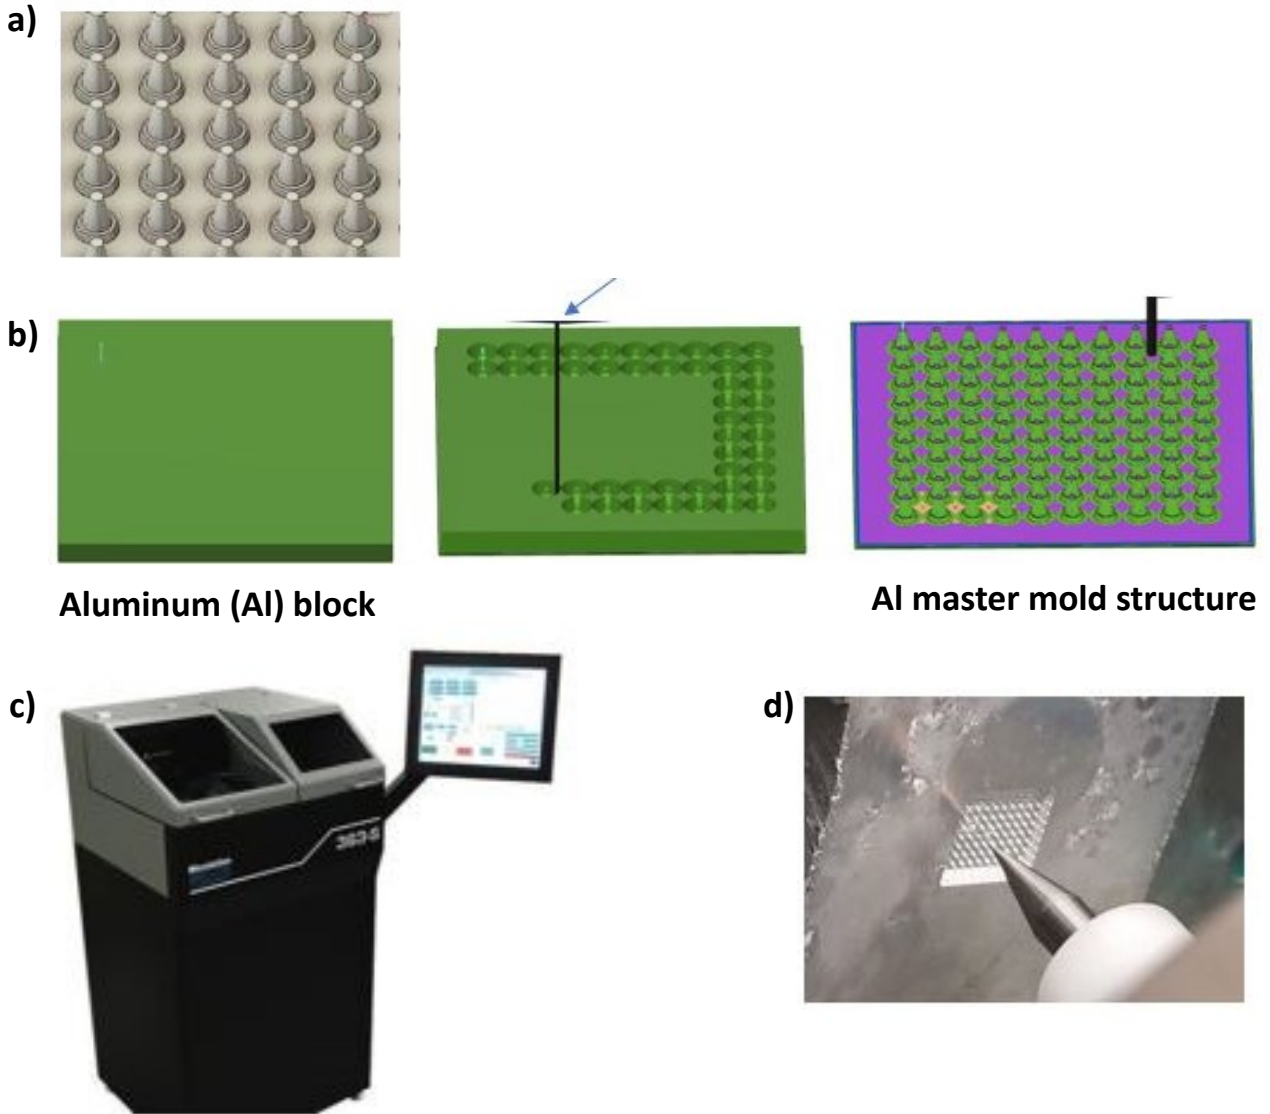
Fabrication with a micromilling machine. (a) Computer aided design, (b) simulation, (c) CNC machine, and (d) live image of fabrication.
